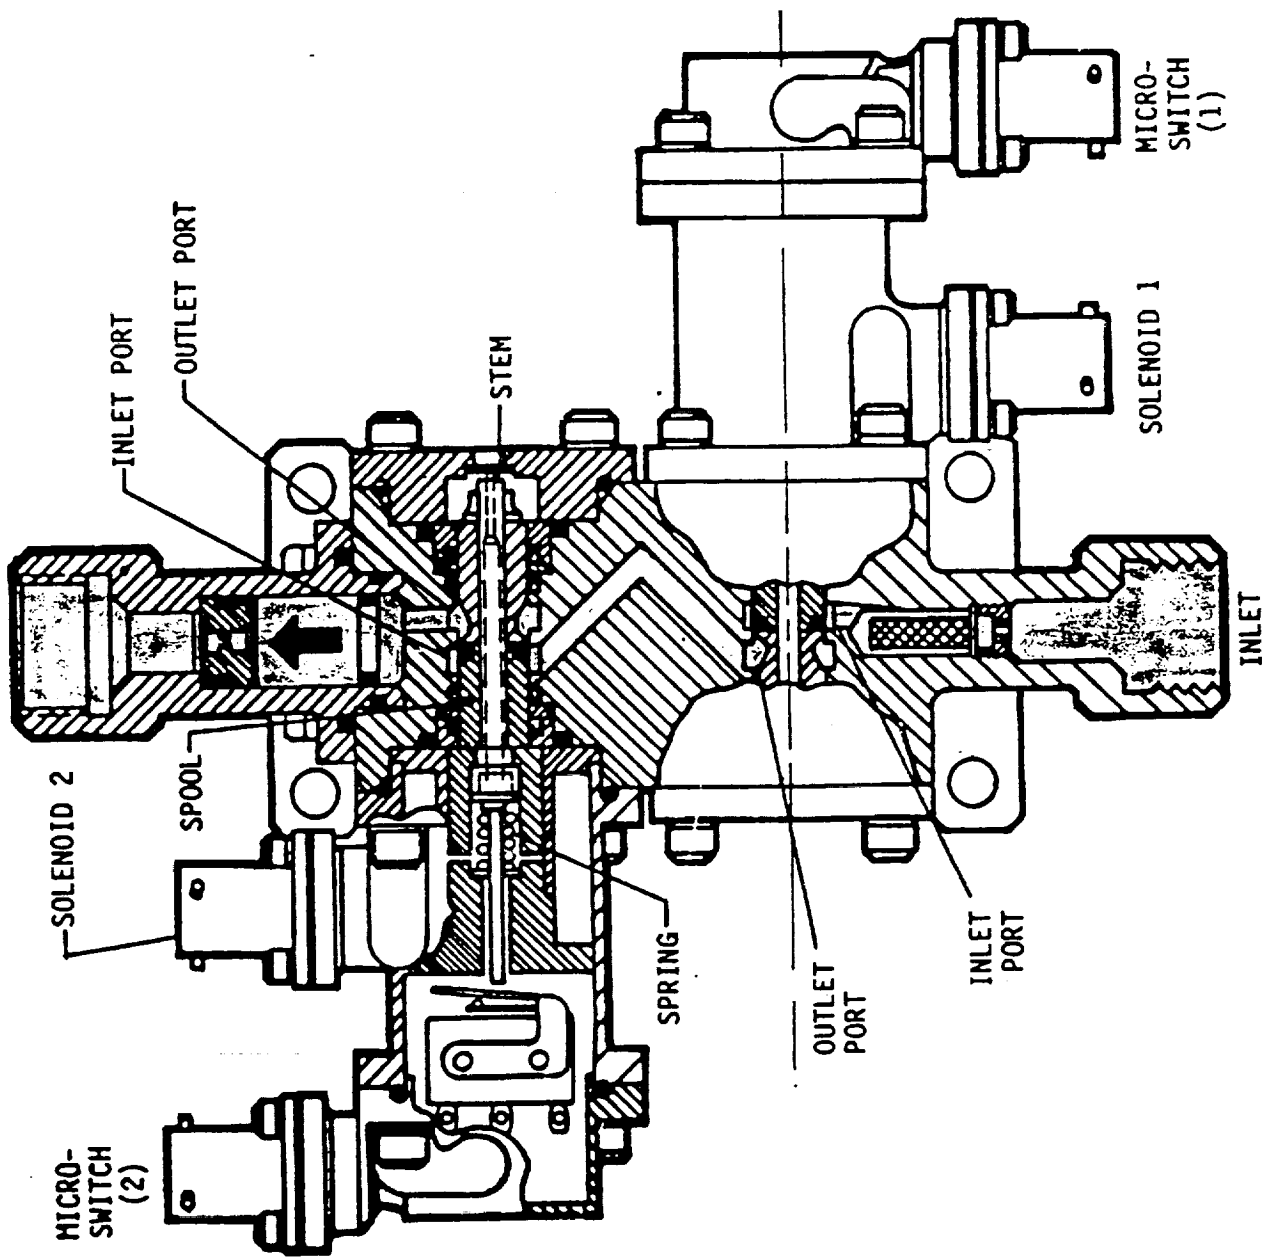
PURGE VALVE ASSEMBLY CROSS SECTION
